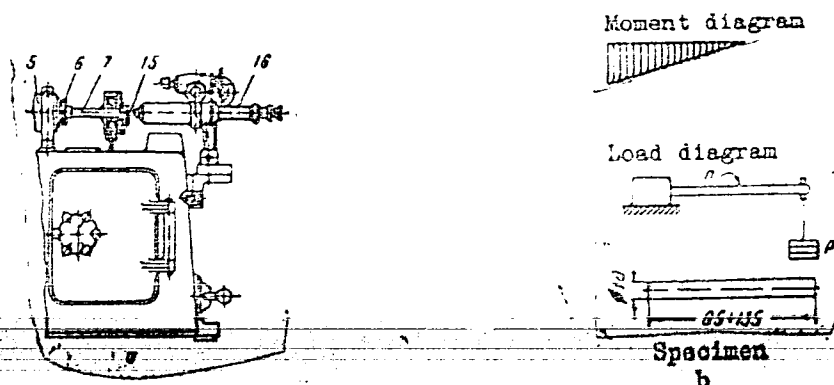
General view of the machine with optical system (a) and loading diagram (b) for cantilever deflection
